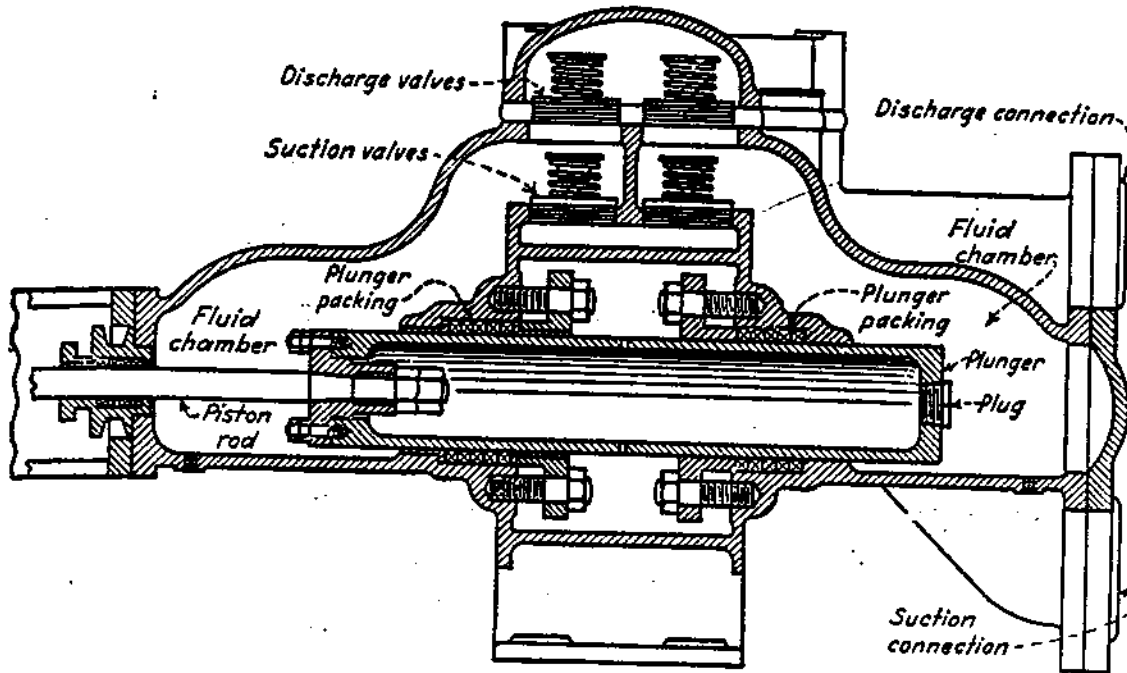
A center-packed cap and valve-plate plunger pump.
